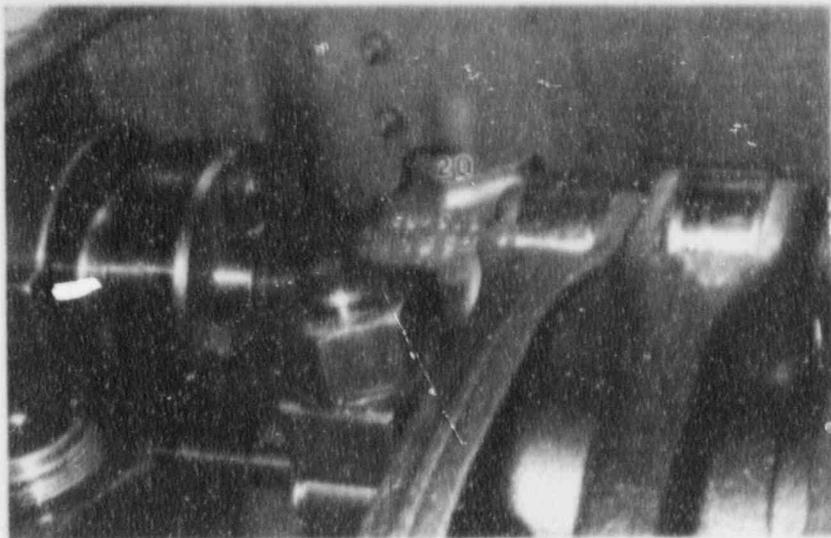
View of the left front top deck area in the vicinity of the stubshaft to camshaft flange connection, bearing block number 20, and cylinder number 11. Note, the discoloration due to heat buildup, the loss of lubrication damage to the rocker arm rollers, and the charred material sprayed on the top deck. The lack of lubrication damage was greatest in this area.
